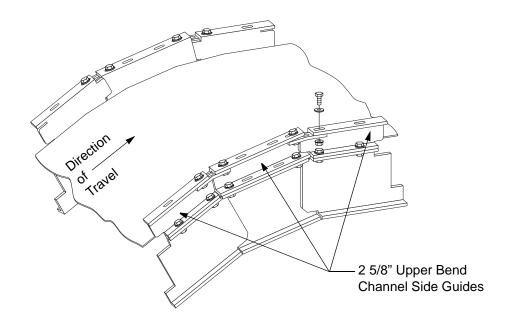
Upper Bend Unit with Channel Side Guides, Direct Mounting
